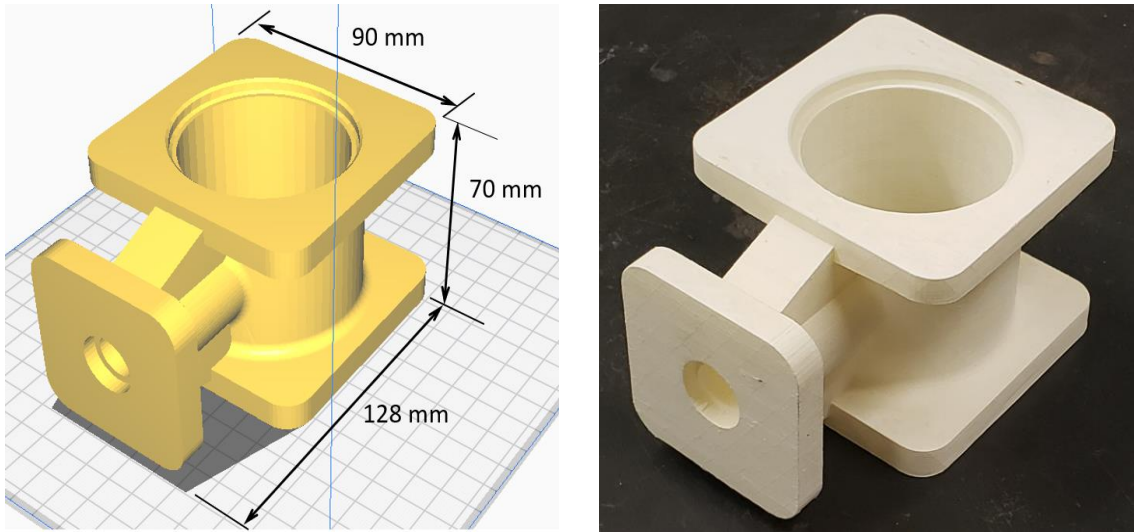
HLFC butterfly valve body for GD&T analysis: 3D model (Left), 3D printed PLA pattern (Right).
